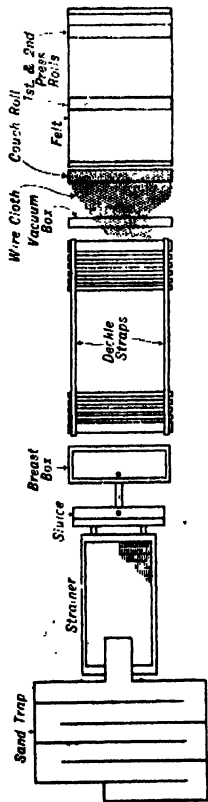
Diagram of a Fourdrinier Papermaking Machine.
